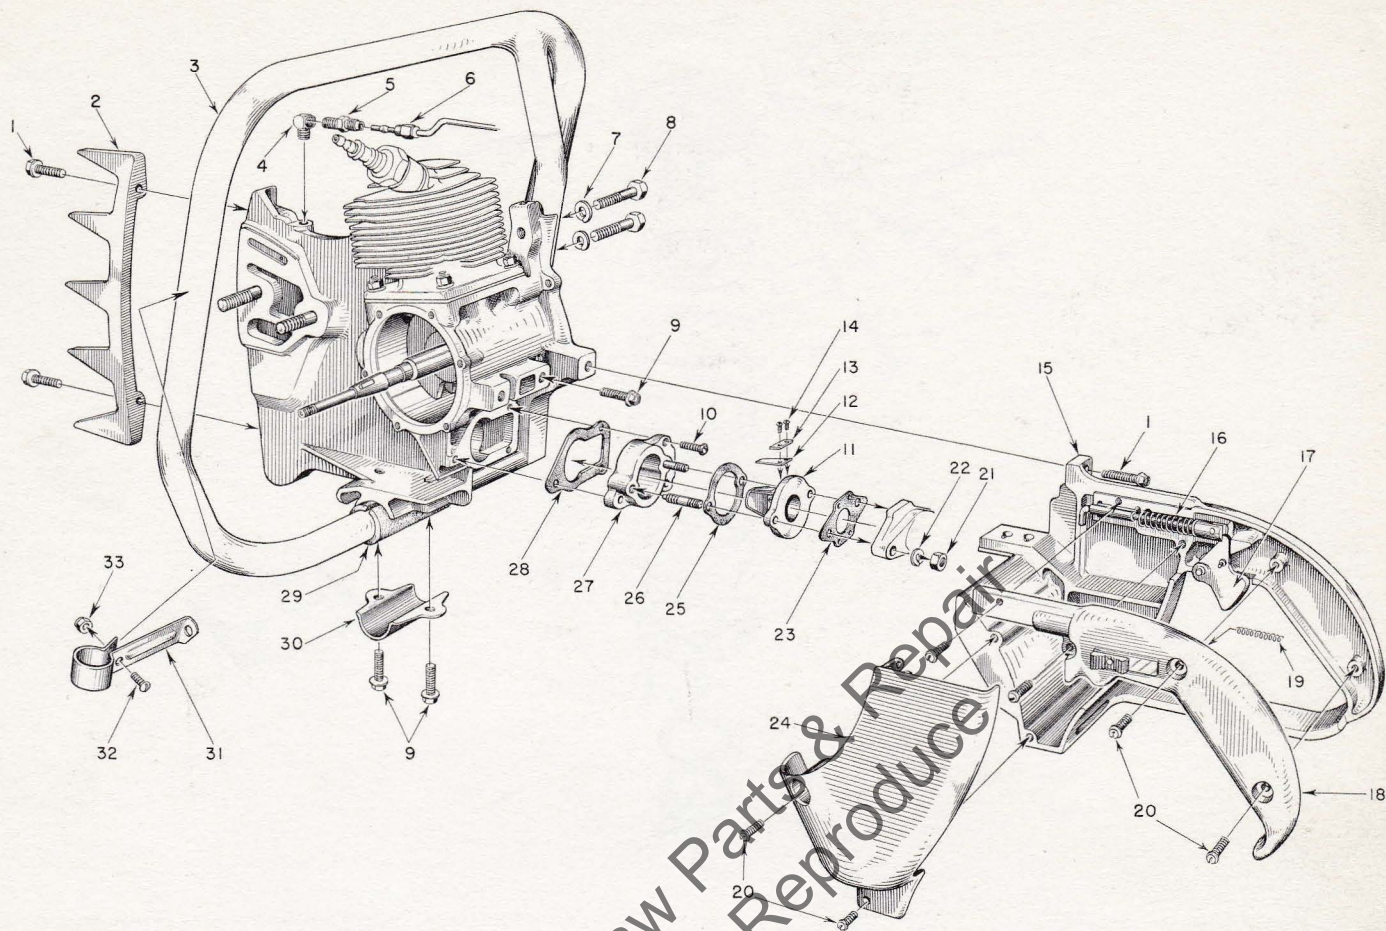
HANDLE, GRIP AND REED VALVE PARTS
